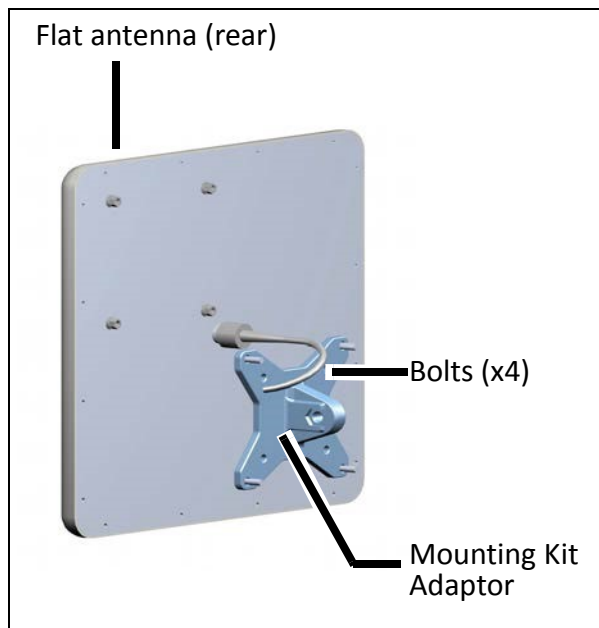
Flat Panel antenna - rear with mounting kit adapter
